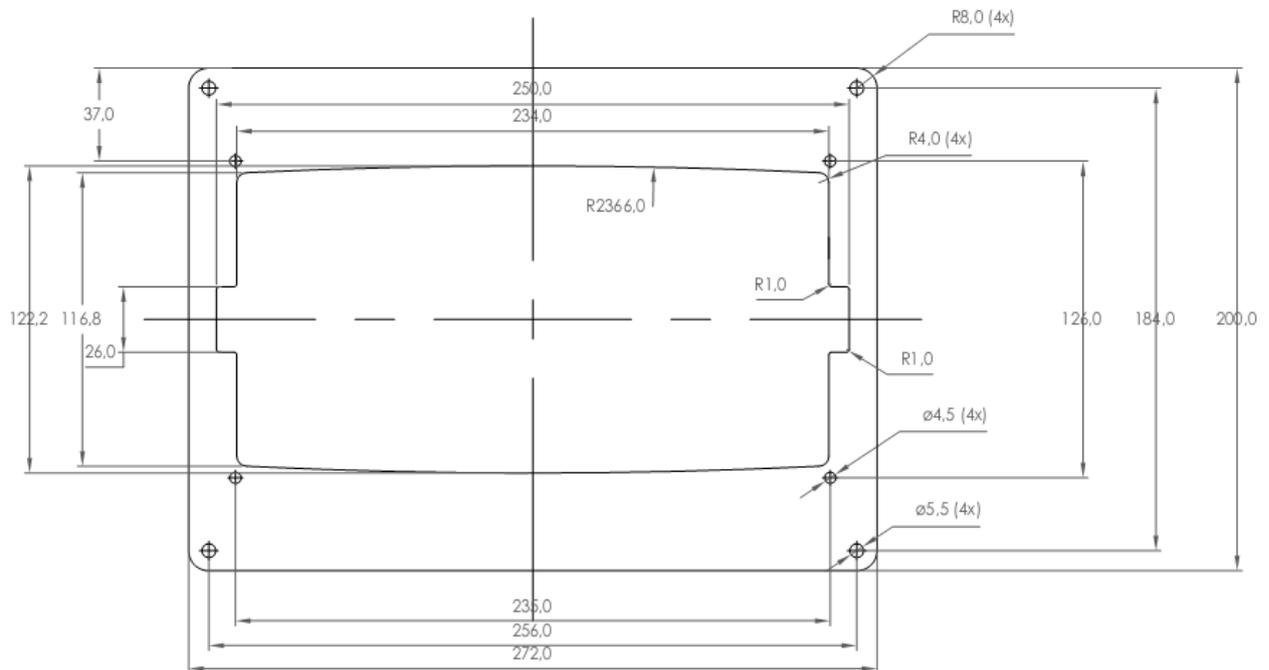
R5 SUPREME CDU, Mounting frame dimensions
